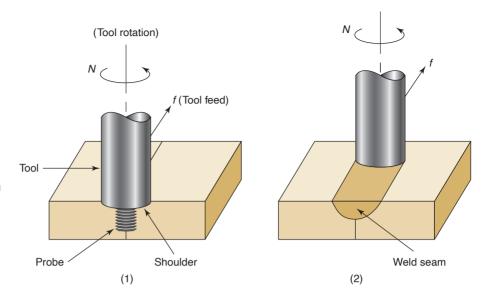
Friction stir welding (FSW): (1) rotating tool just prior to feeding into joint and (2) partially completed weld seam. N = tool rotation, f = tool feed.
